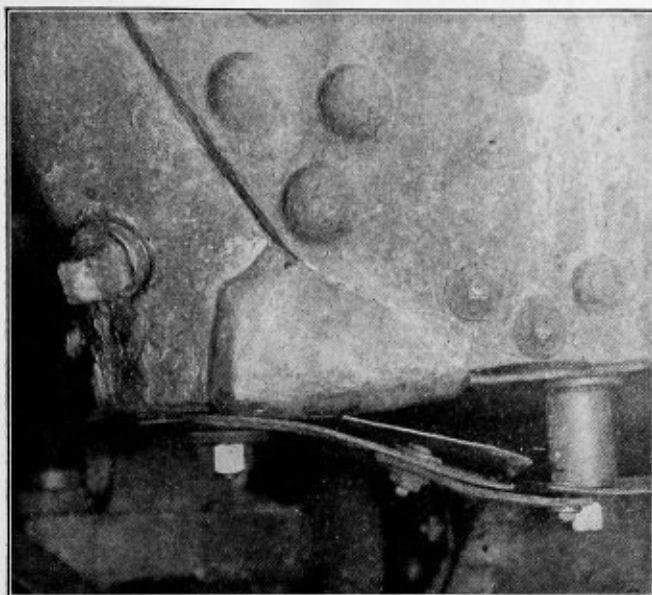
THE FINISHED WELD ON THE MUD RING AND SHEET
